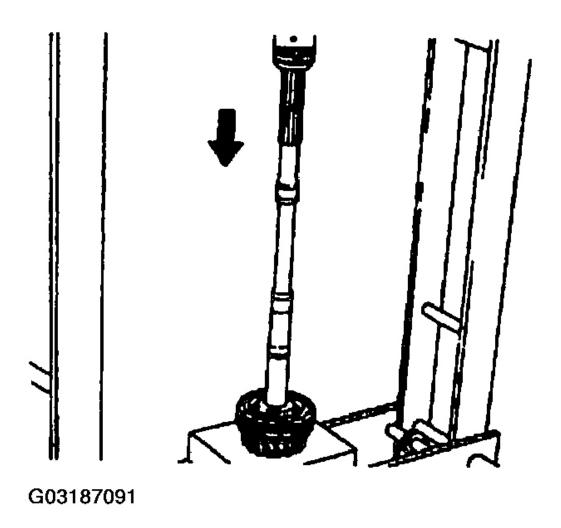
Removing 1st/2nd Clutch Hub Component, 2nd Synchronizer Component & 2nd Gear Courtesy of MAZDA MOTORS CORP.
